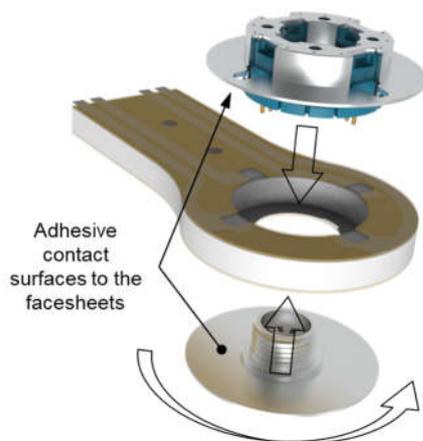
Form locking and tolerance adjustment by two-component design of the insert.
